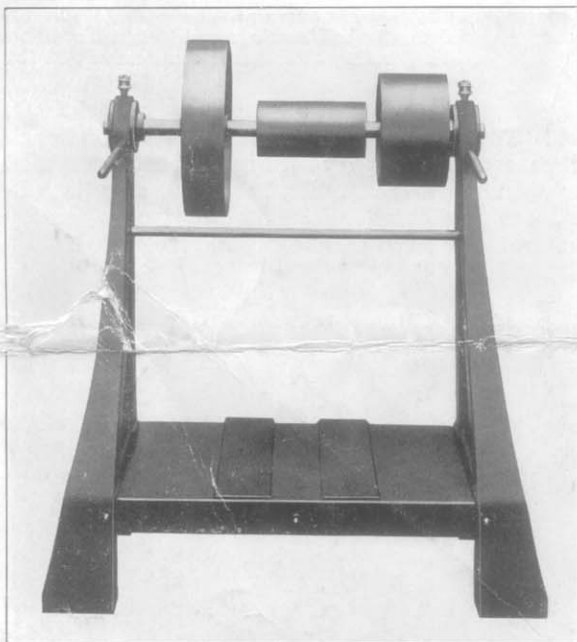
Individual Motor Drive Jackshaft, ball-bearing
